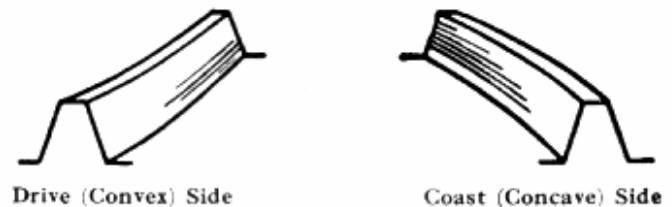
Pinion Set Too Deep—Tooth Bearing
